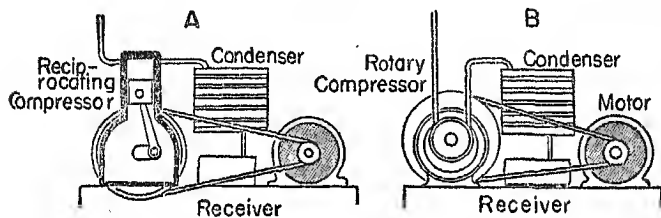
The Compressor May Be of the Reciprocating Piston Type, or Else a Rotary Type.
